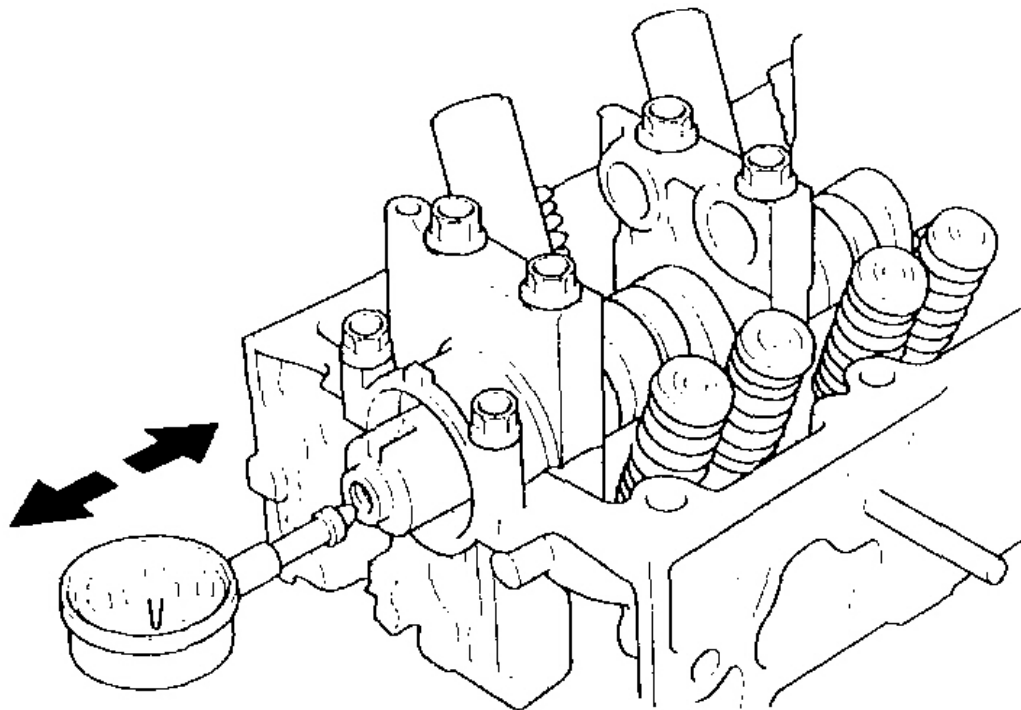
Putting Camshaft & Camshaft Holders On Cylinder Head
